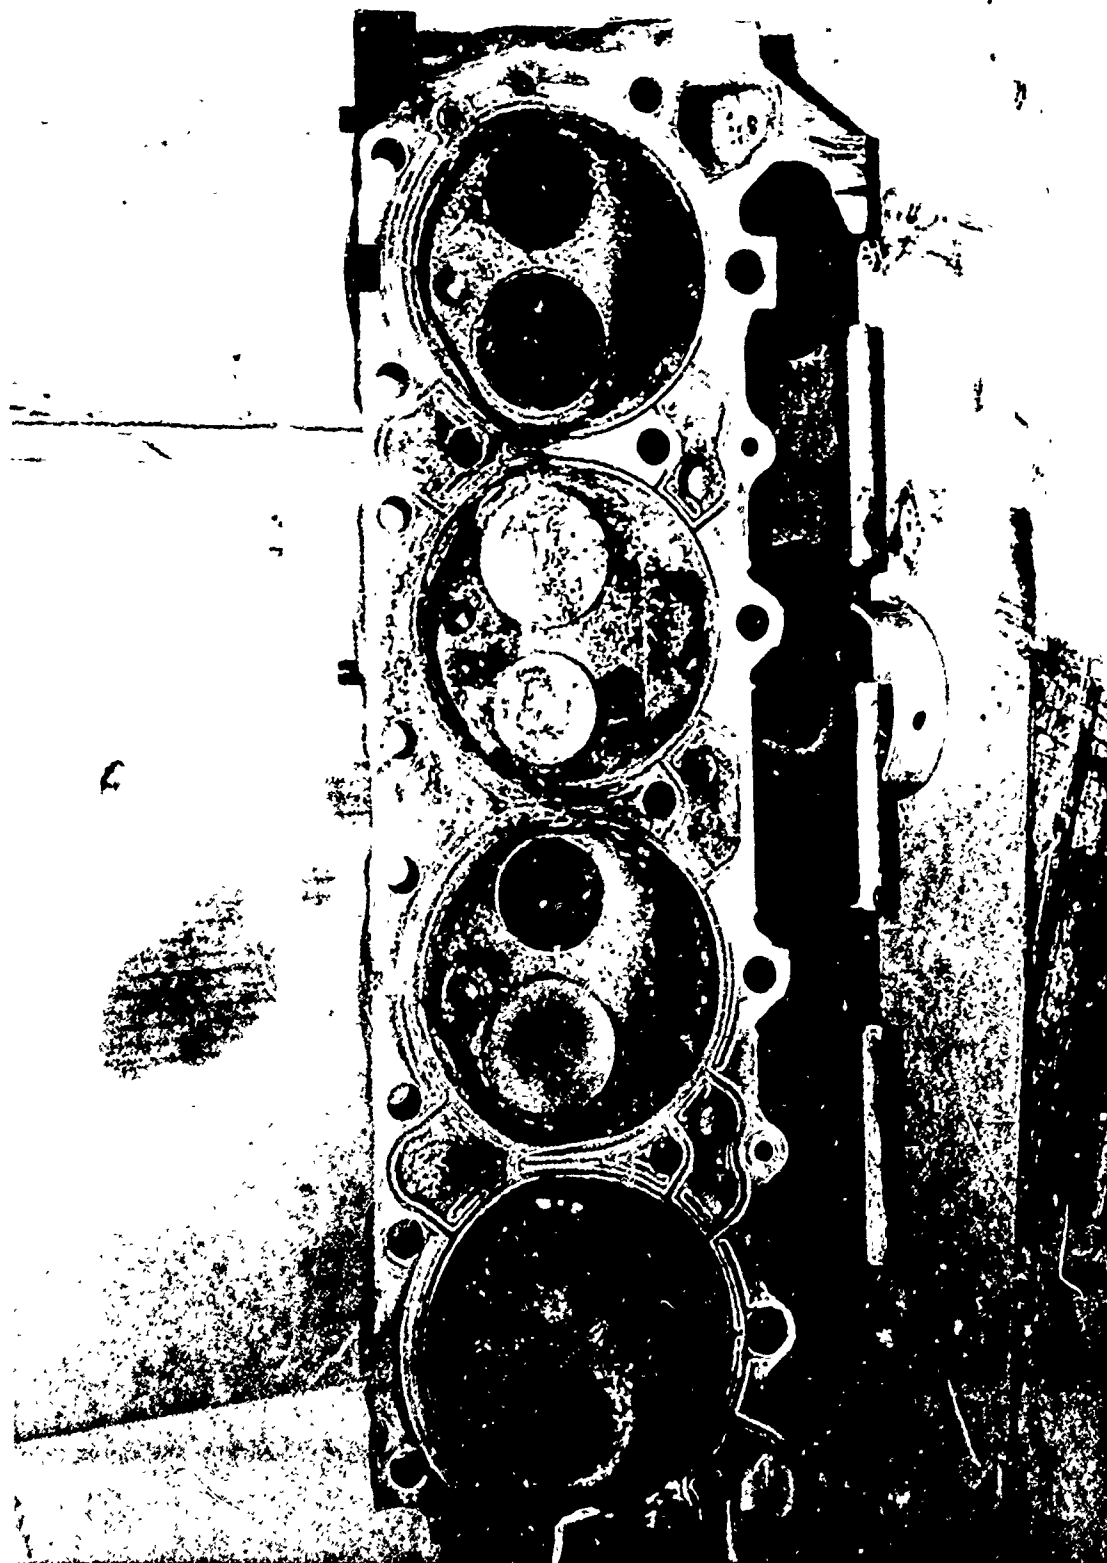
CHRYSLER 75M ENGINE, SN 23962, SHOWING METAL TRANSFER ON CYLINDER NO. 4 COMBUSTION SURFACE AND VALVES.
